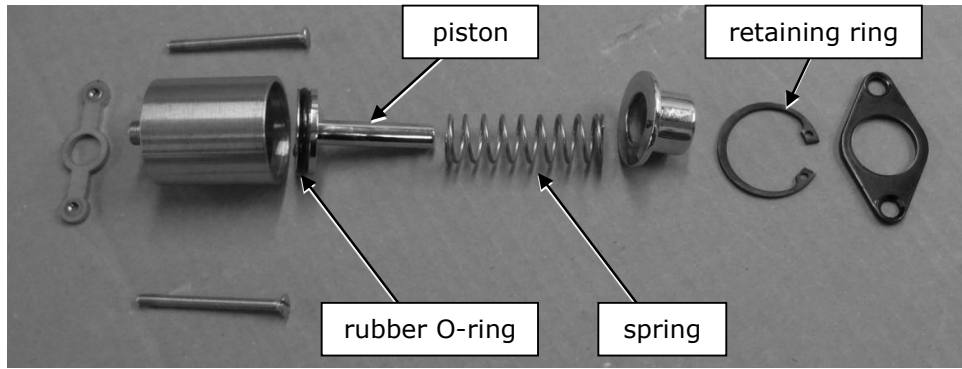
Exploded view of progressive pre-infusion cylinder.
